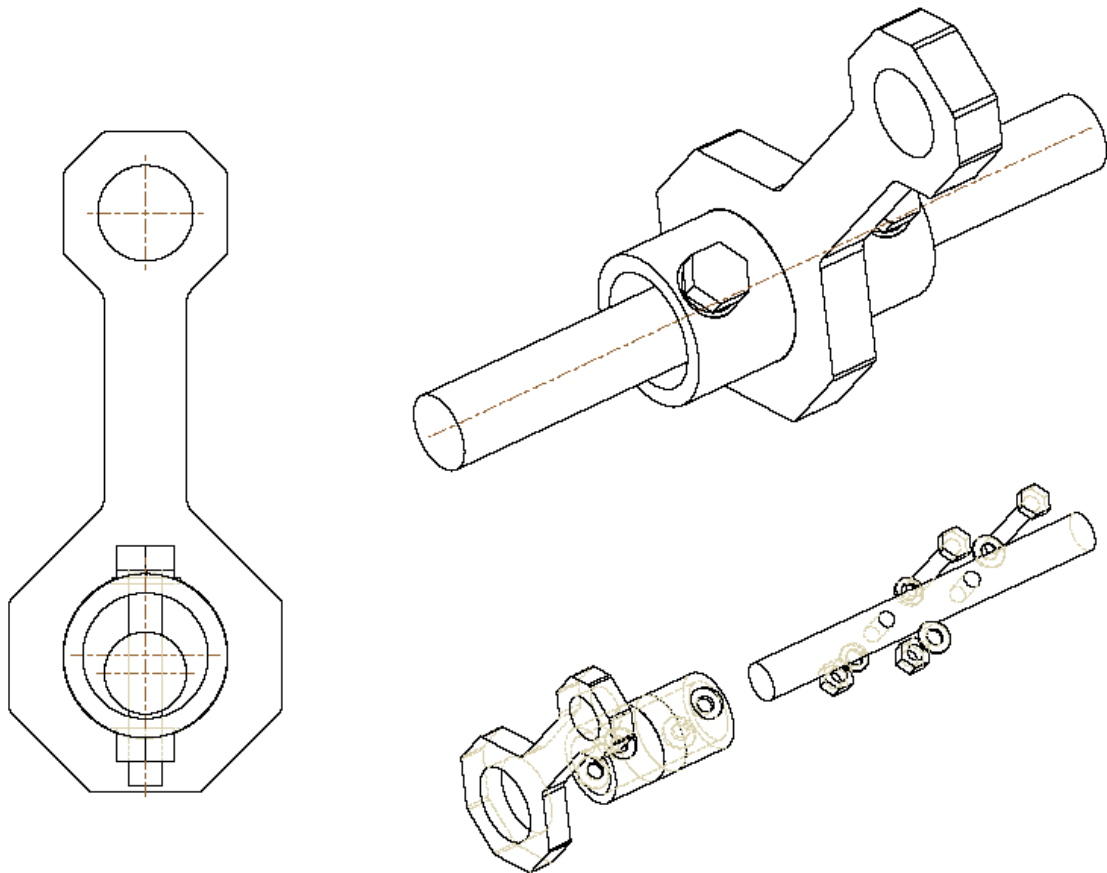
Schematic of eccentric drive mechanism (EDM)
